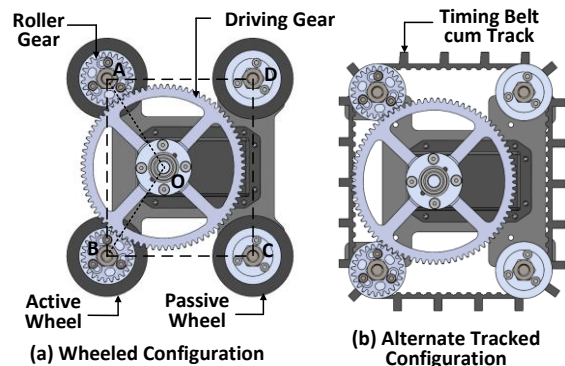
(a) CAD Model of the WU showing the gear-pulley-wheel assembly. (b) alternative configuration using tracks instead of wheels.
